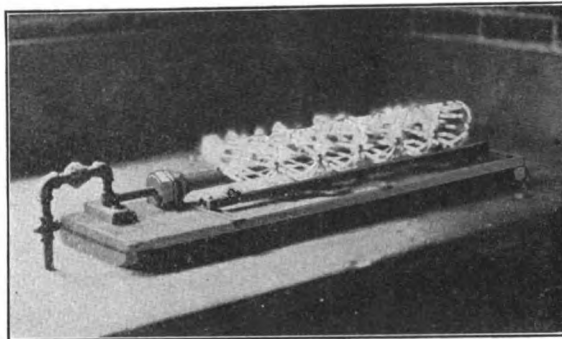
MELTING TIN OUT OF THE SOCKETS ON A SPECIAL GAS FIXTURE
